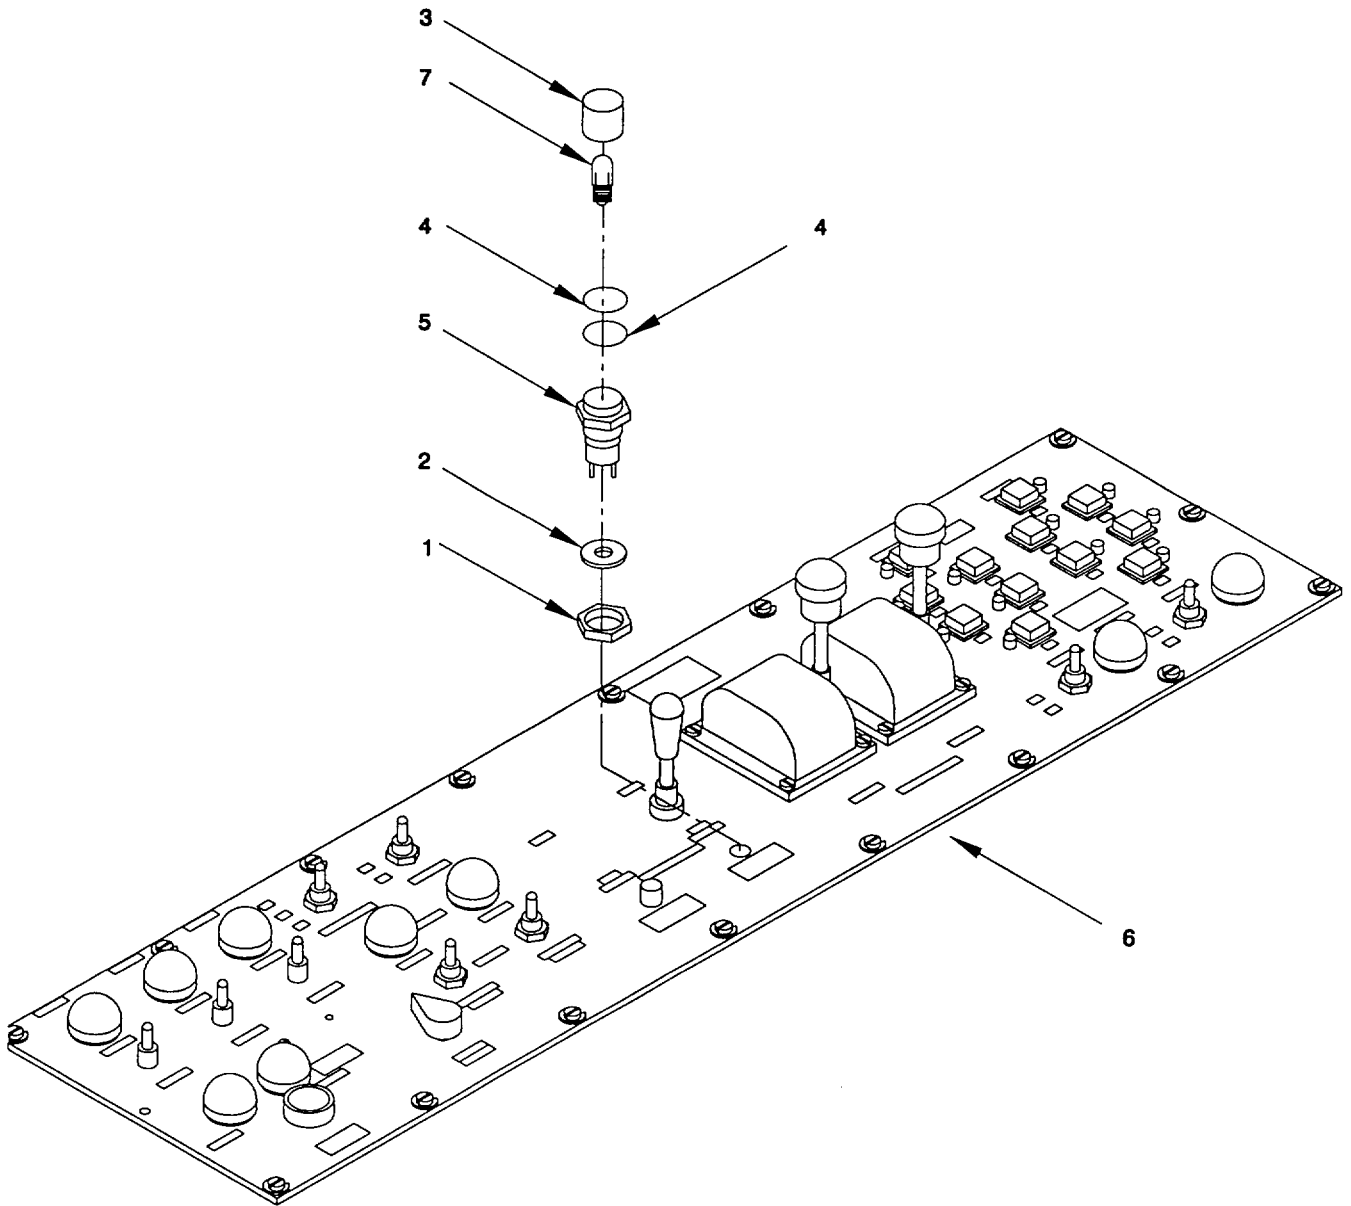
Indicators, Thruster Gearbox Oil Low, Lower Control Panel "A2", Remove/Install.
